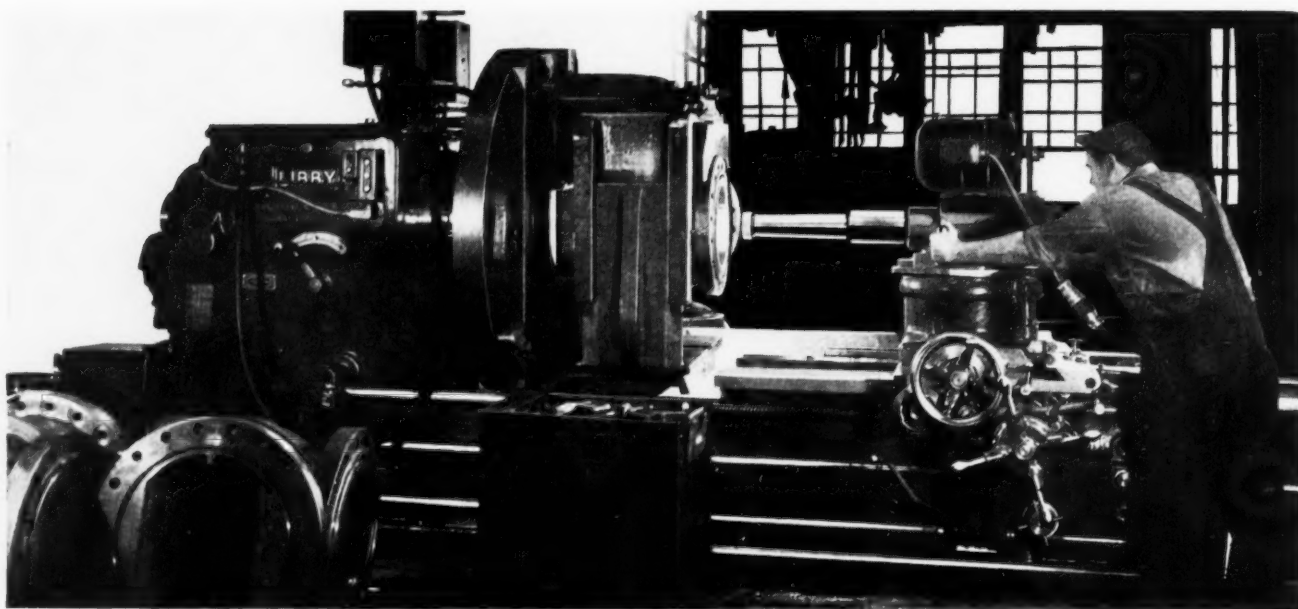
Grinding the Tapered Seats of an Angle Type Valve in a Turret Lathe Equipped with an Ex-Cell-O Grinding Spindle
